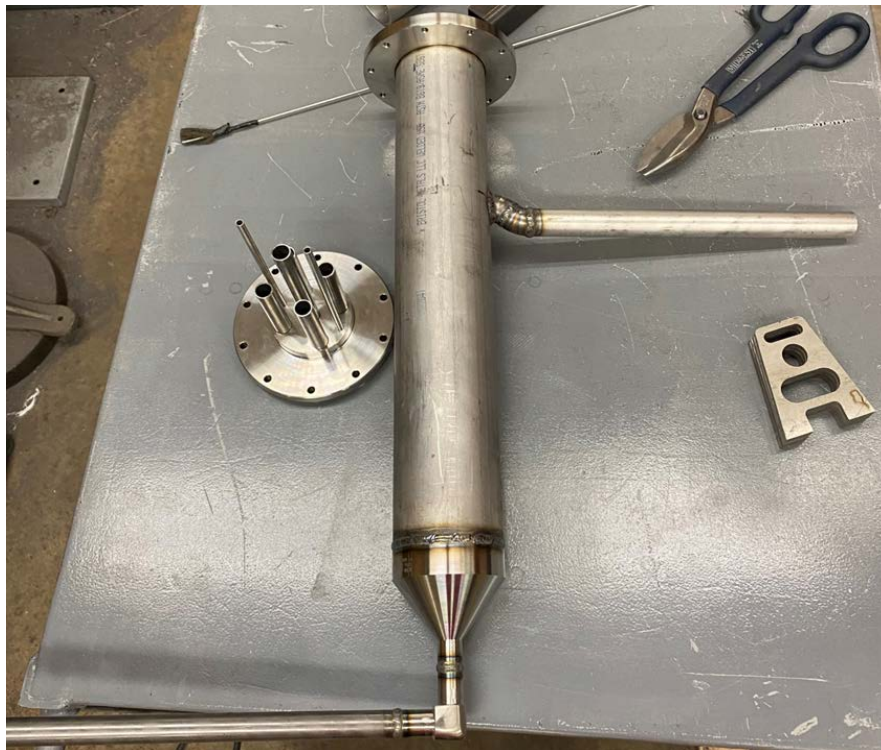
Completed electrode assembly for purification vessel and salt tanks.
